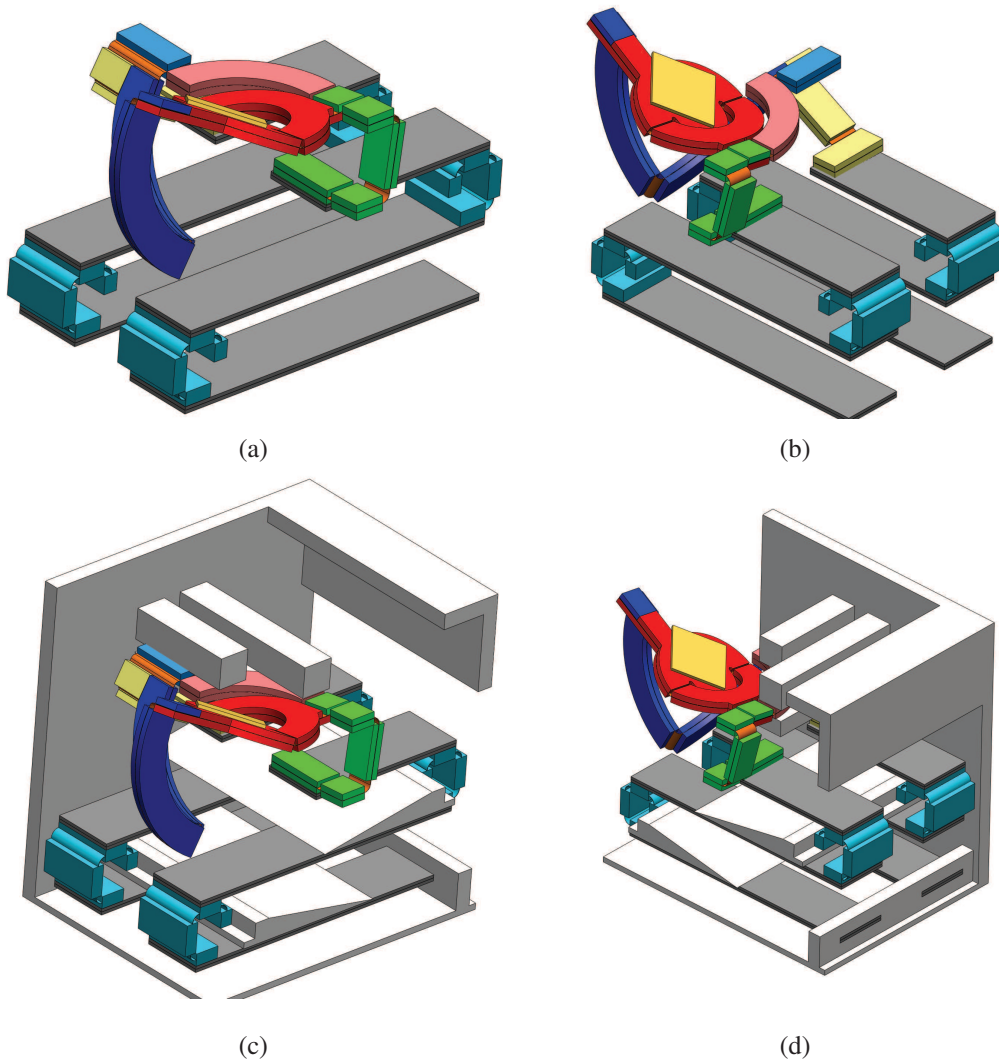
(a) CAD design of the assembled microrobot. (b) A micromirror layer device is placed on the platform. (c) CAD design of the complete assembled microrobot including its support. (d) Other view of the microrobot Micro Agile-Eye.
